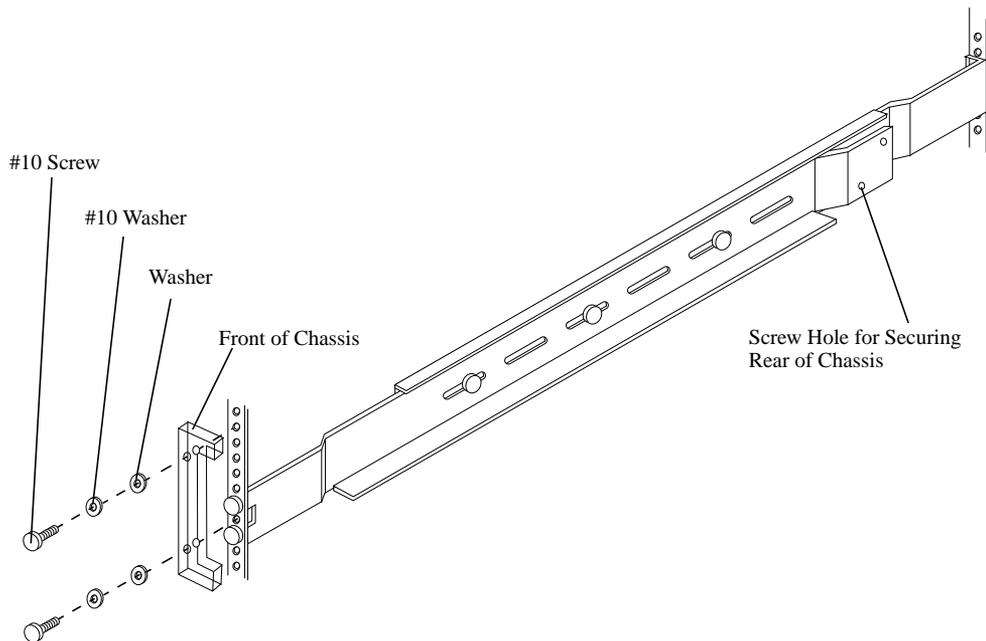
Securing Chassis to Threaded-Hole Rack (Left Hand)
